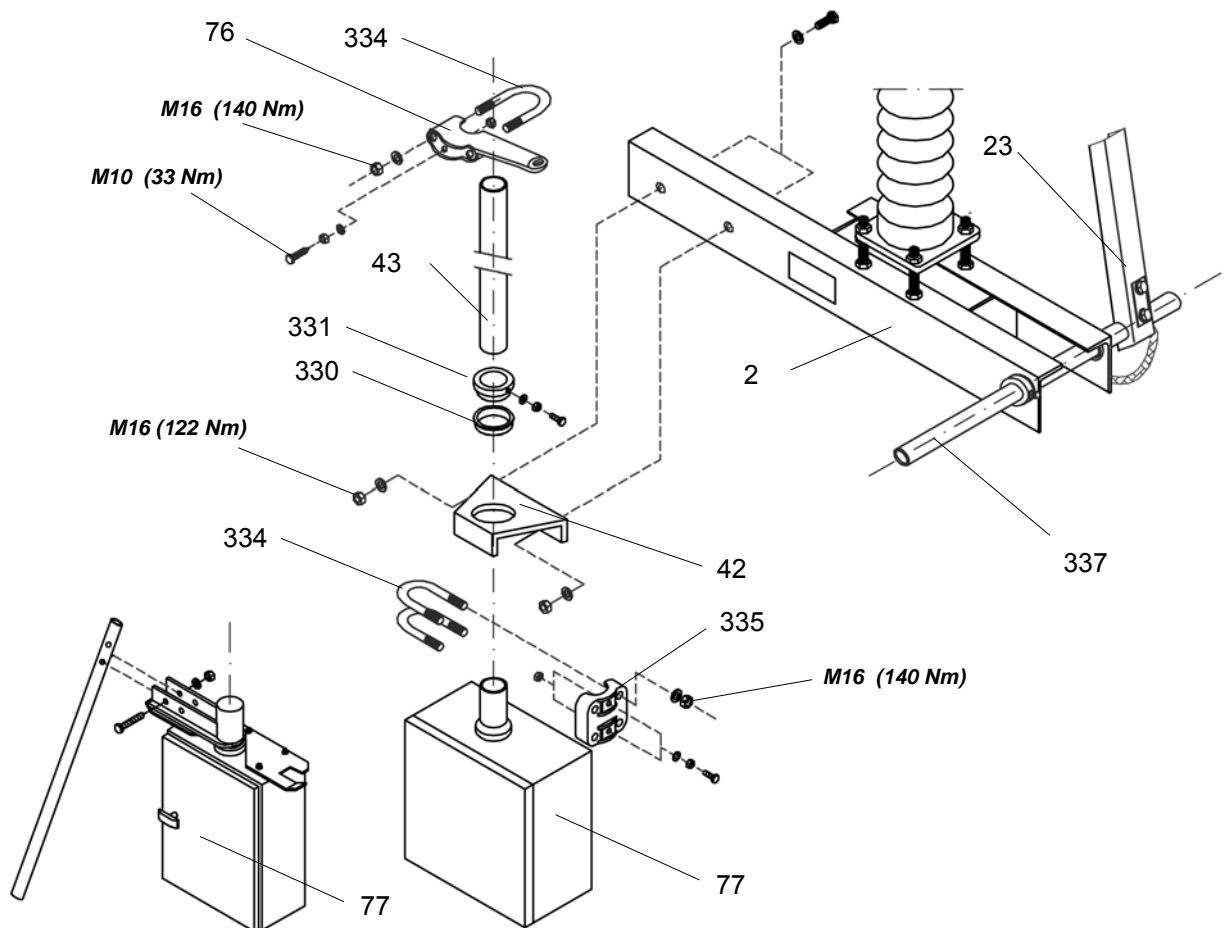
Mounting of operating mechanism for earthing switch, separate mounting
